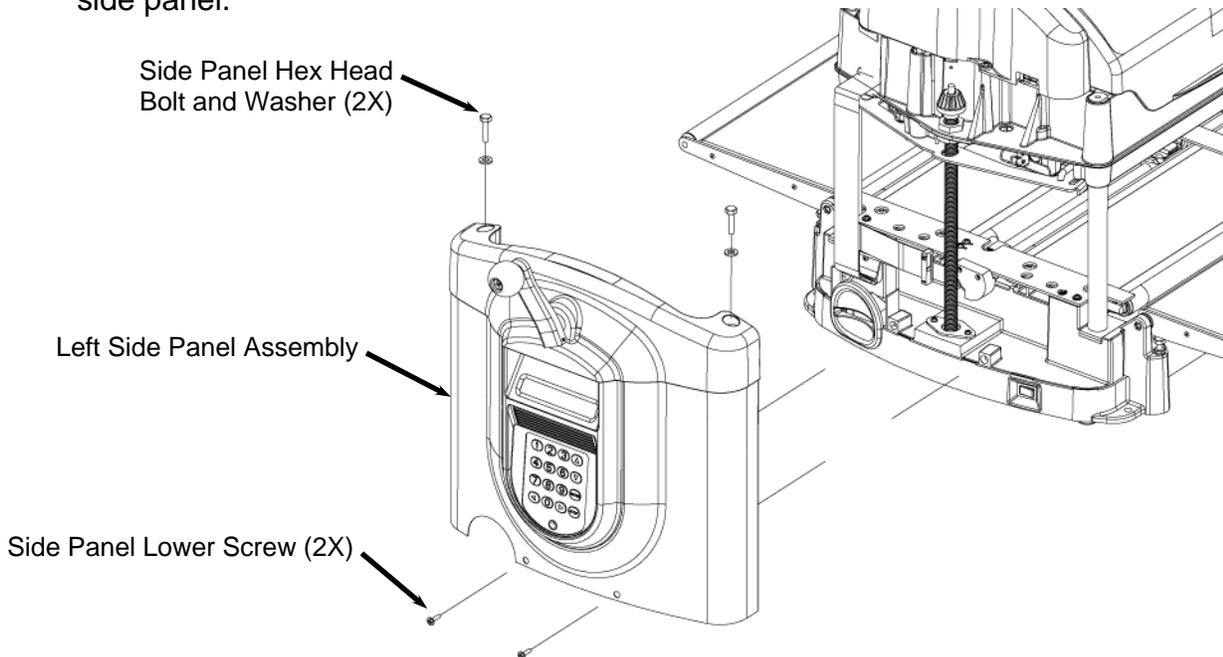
EXPLODED VIEW OF THE LEFT SIDE PANEL FASTENERS
